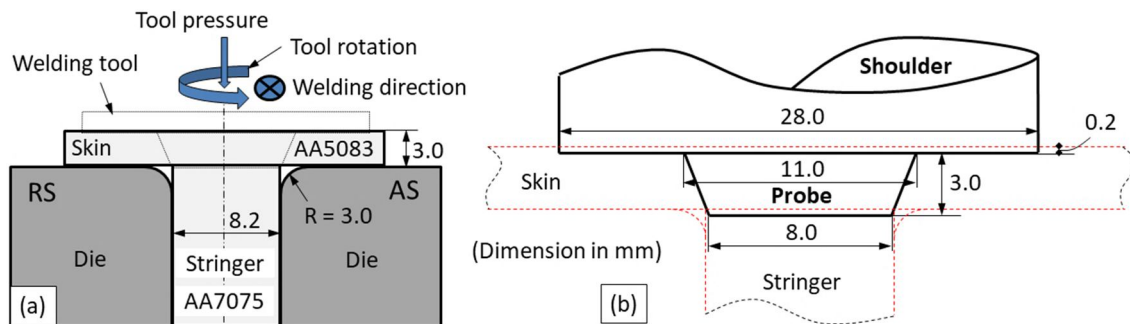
(a) Schematic view of T-lap joints and (b) detail geometry of welding tool.
